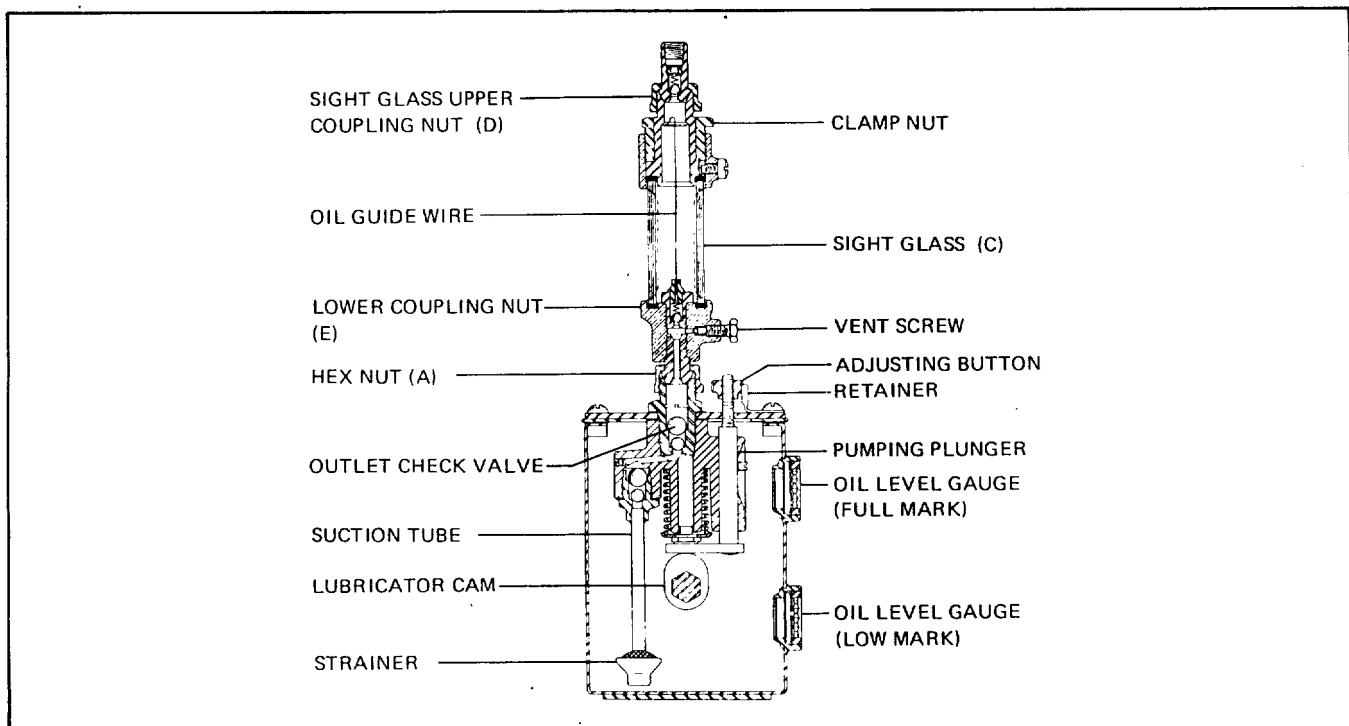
Force Feed Lubricator Assembly of Pumping Unit and Sight Dome.
